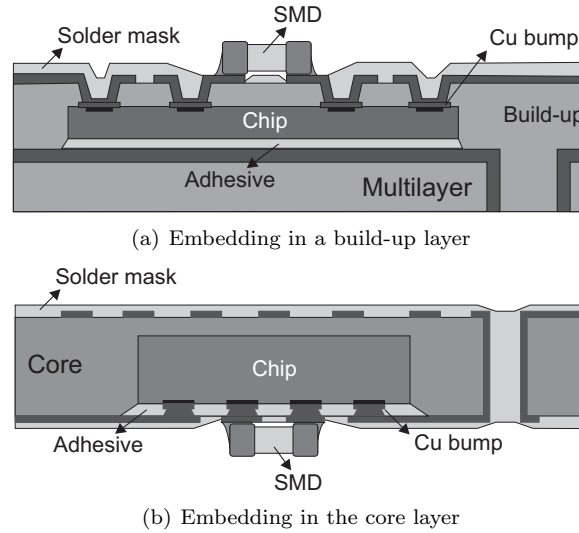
Schematic drawing of two methods for chip embedding in printed circuit boards
